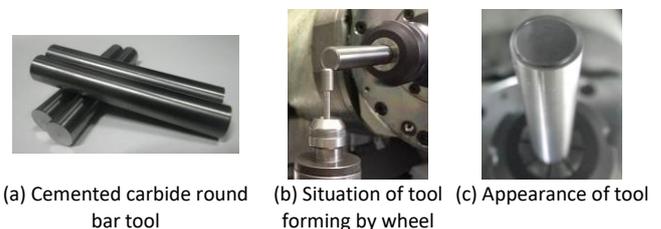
On-machine forming of rotary cutting tool with small diameter grinding wheel
